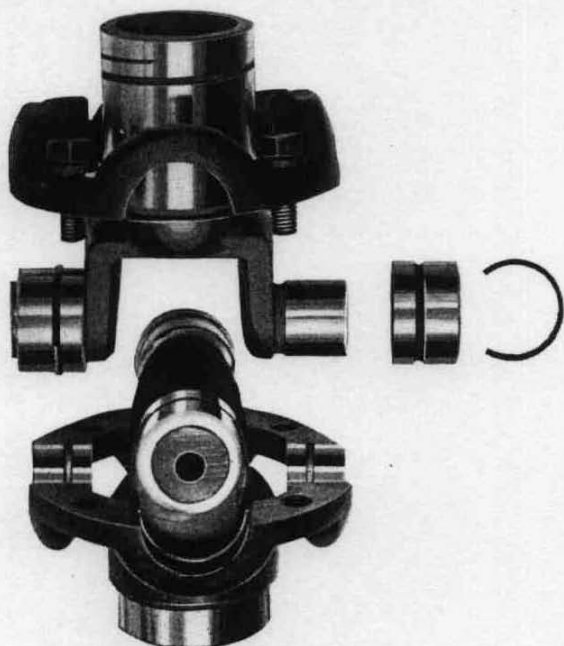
Universal Joint Disassembled to Show Bushings and Locks.
